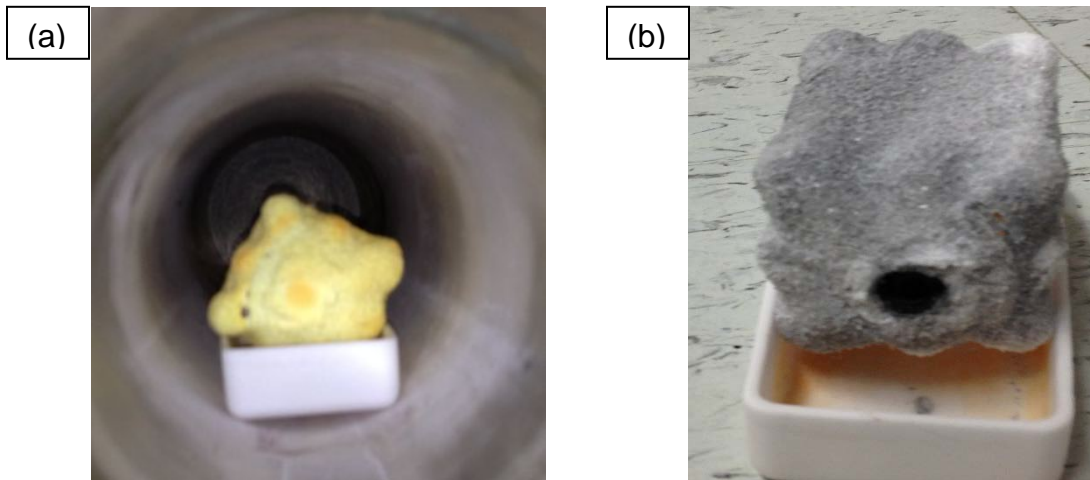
(a) ABS Mold in the Oven, (b) ABS Mold after Burn Out
